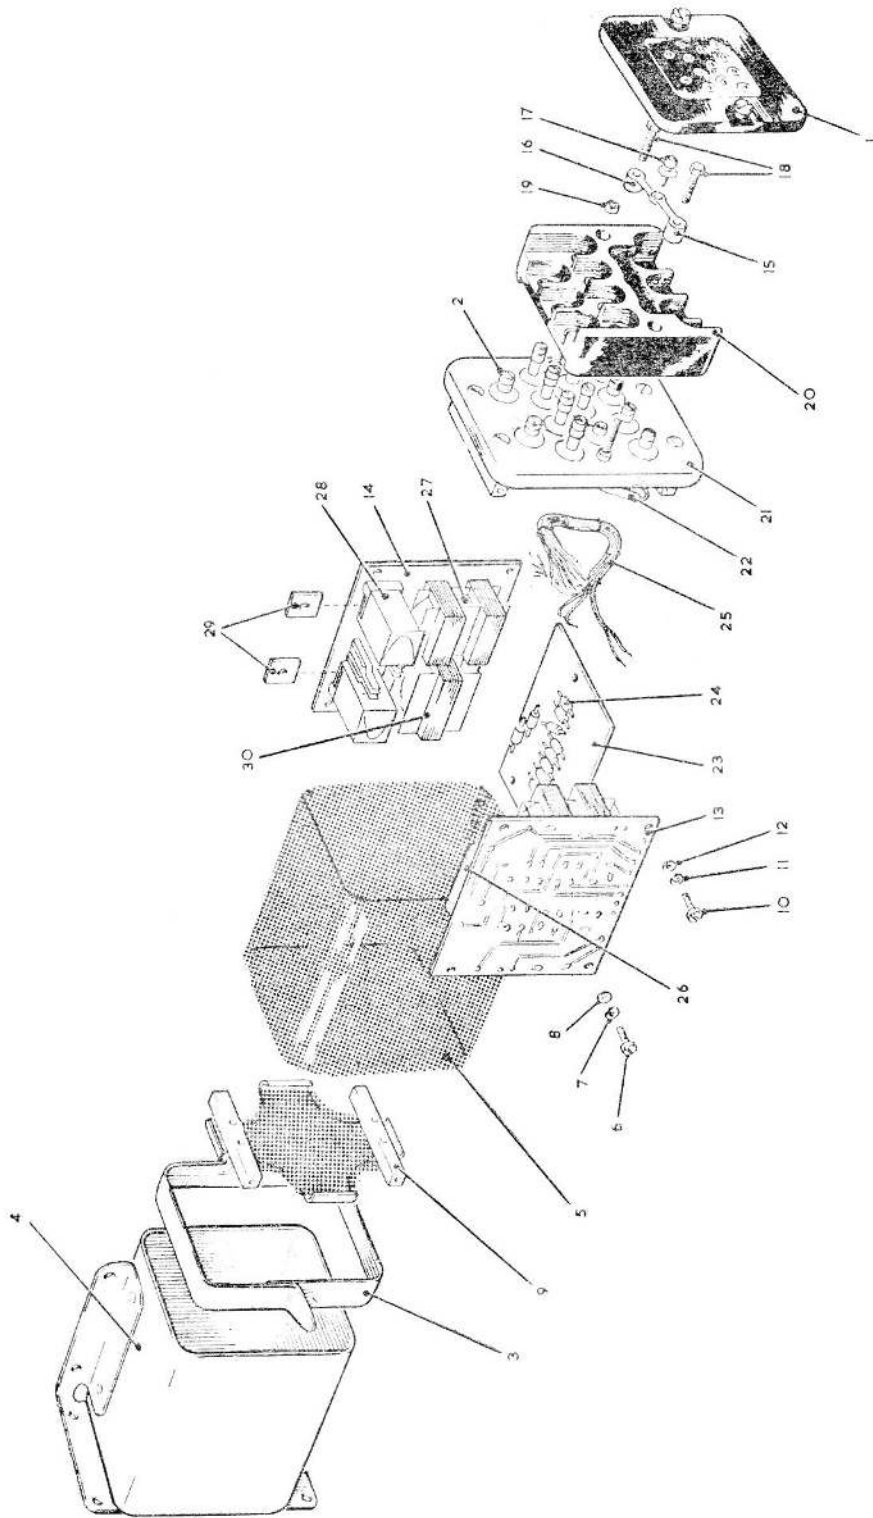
Exploded view of de-icing controller, Type 4, Mk. 1
